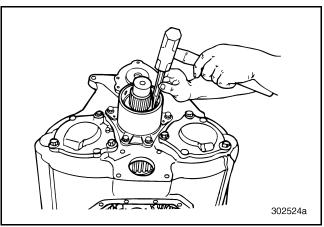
Seating the Bearing Cone and Spacer (T313L21/T318L21 Shown)
